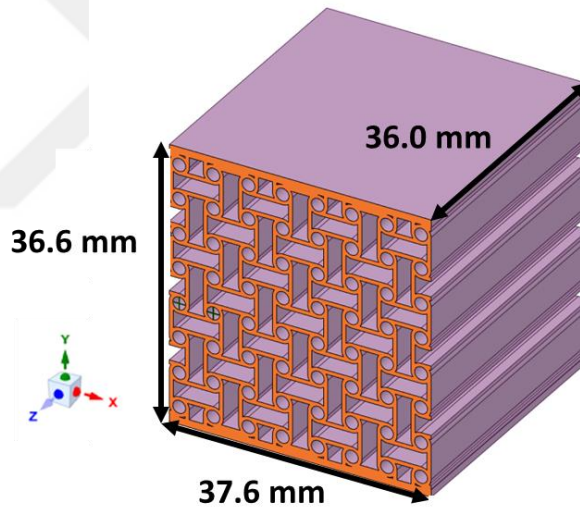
Geometric details of anti-tetrachiral specimens used in the compression test.
